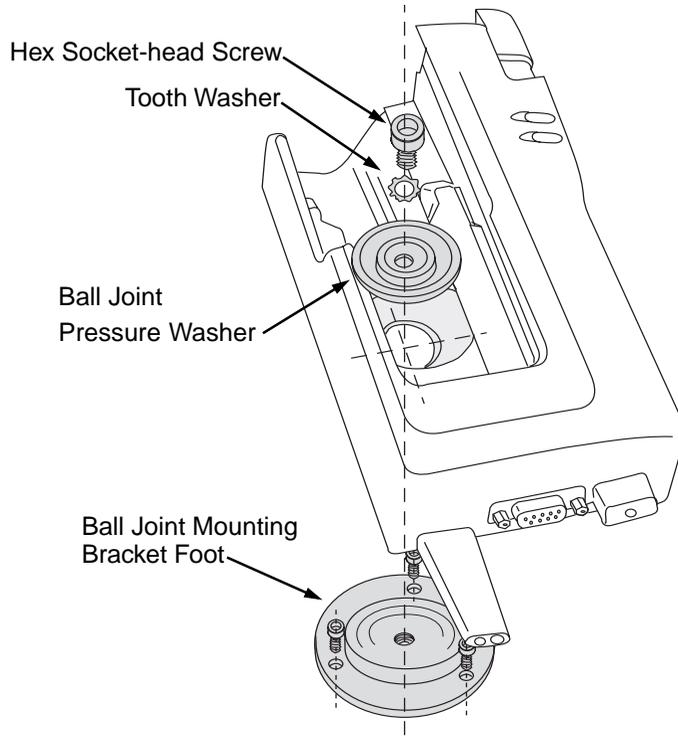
Vehicle Adapter Ball Bracket Mounting
